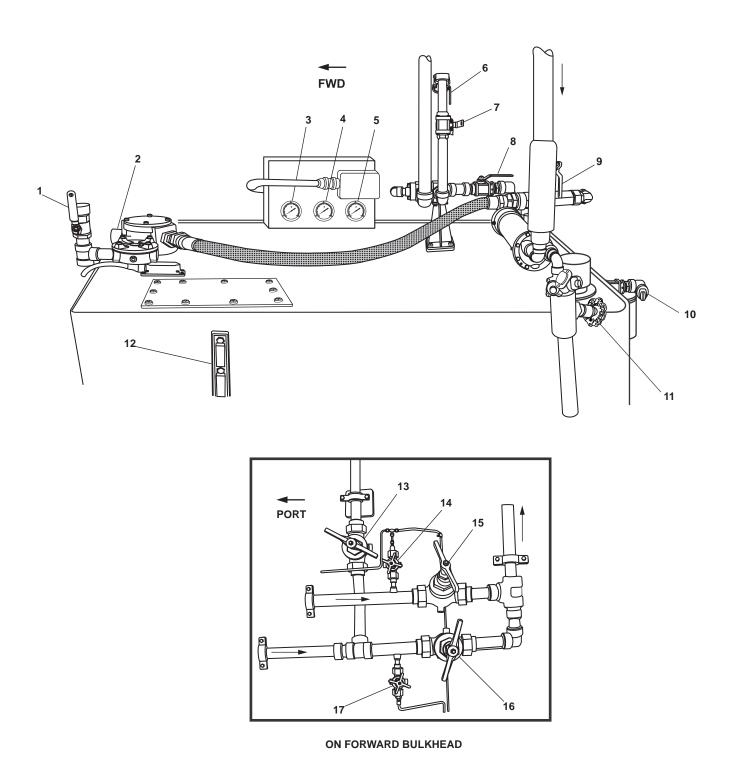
Towing Machine Hydraulic System Operator Controls and Indicators
